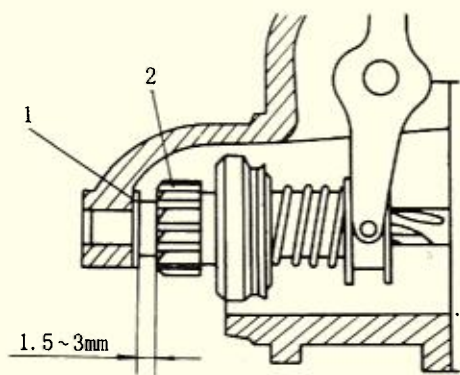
Check and adjustment of overrunning clutch gear and thrust washer
